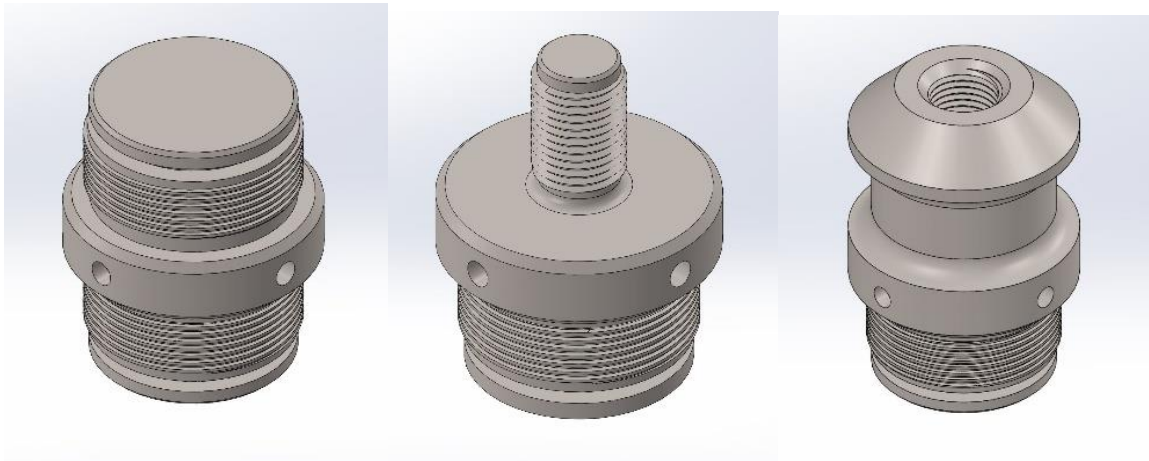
[from left to right] Sampler-to-sampler coupler, sampler-to-ship connector, sampler-to-sinker bar connector.
